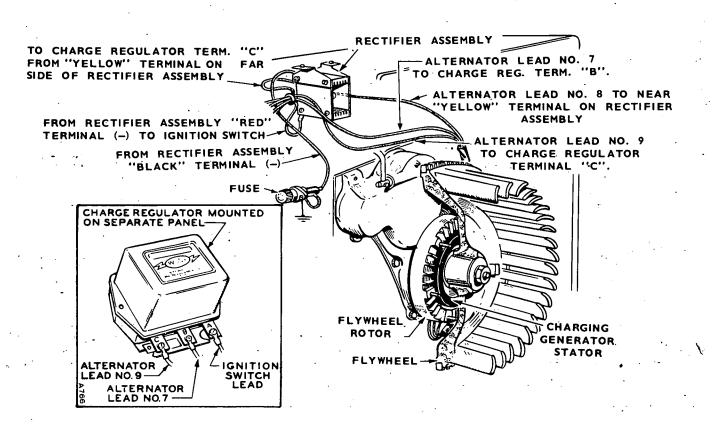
FLYWHEEL ALTERNATOR (PRIOR TO SPEC'T)
